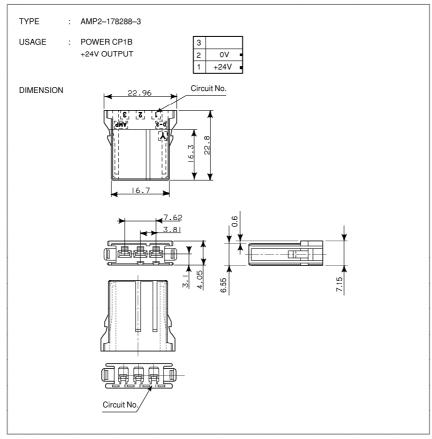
(d) Connector (4) for +24 V power supply manufactured by Tyco Electronics
